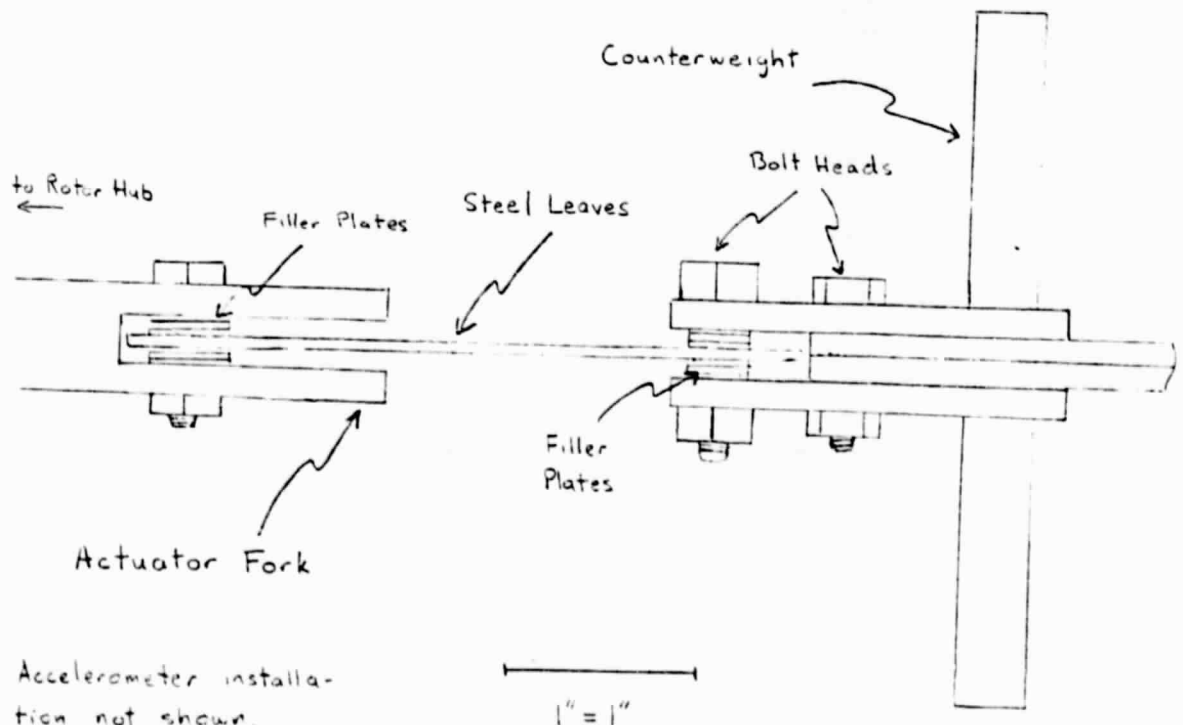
Detail of Blade Installation, Mechanical Spring Configuration
